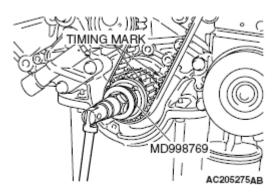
Turning Crankshaft 1/4 Turn Counterclockwise Courtesy of MITSUBISHI MOTOR SALES OF AMERICA.
